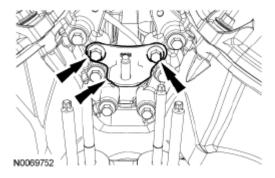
Locating Engine Mount Studs Courtesy of FORD MOTOR CO.
